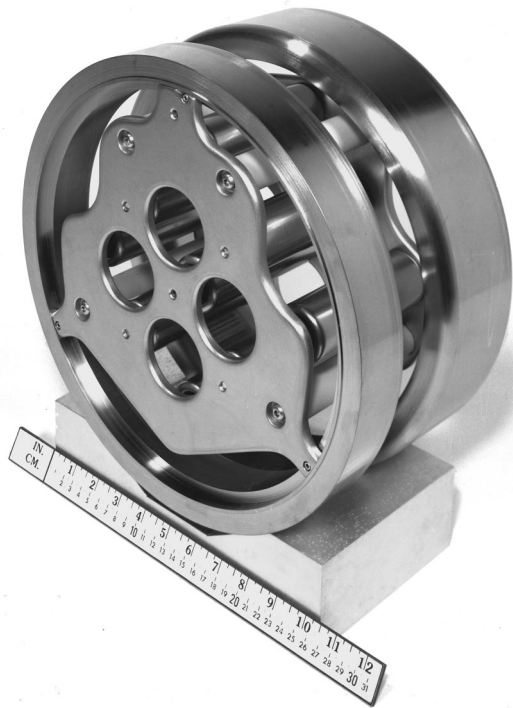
Picture of an actual MBE-4 electrostatic quadrupole assembly.
